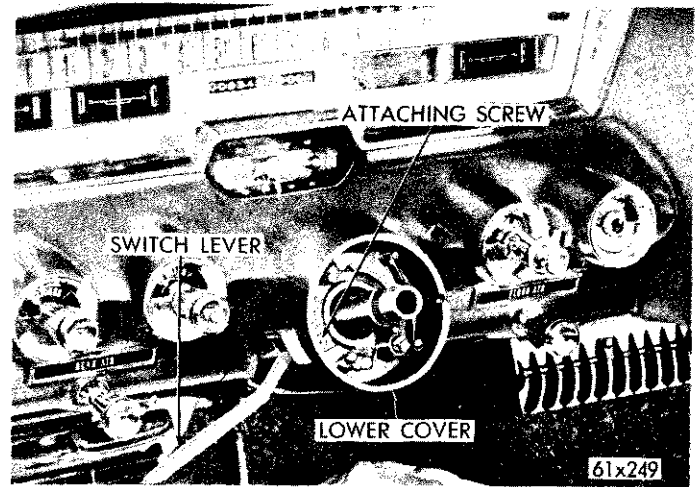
Directional Switch and Lever—Steering Wheel Removed
